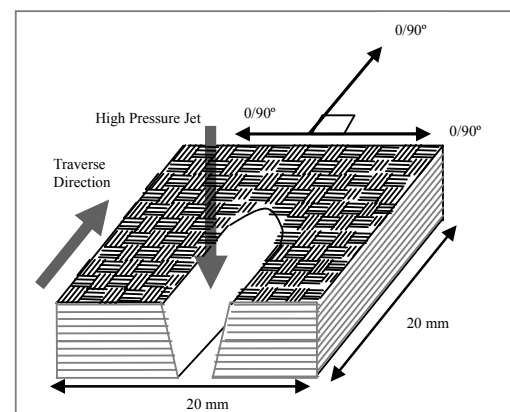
Illustration of AWJ cutting on Kevlar laminate
